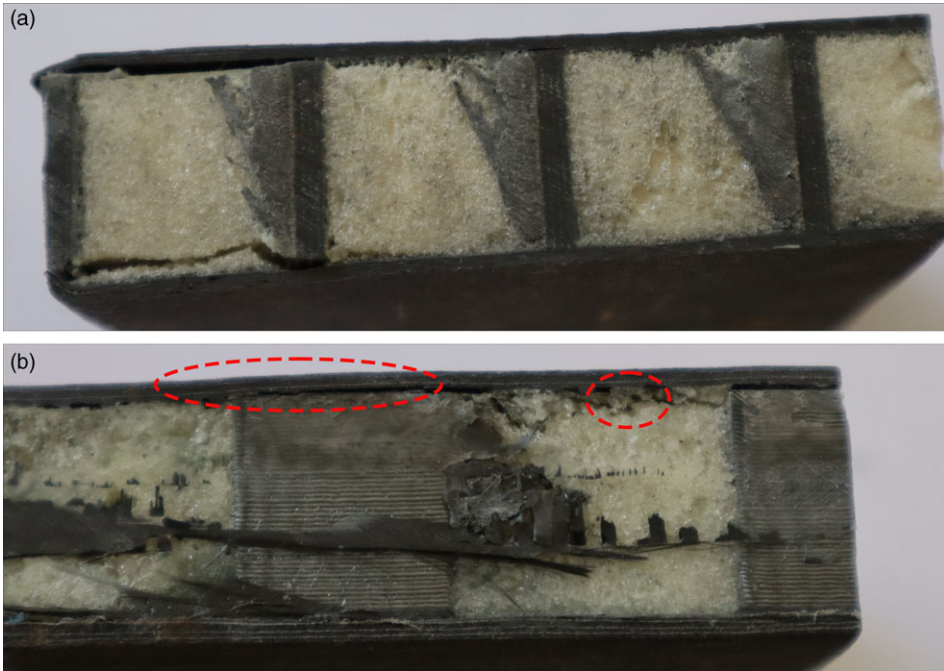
Failures in the sandwich structure filled with polyurethane foam; (a) face-to-core cracks, (b) face buckling and cracks in foam filling.
